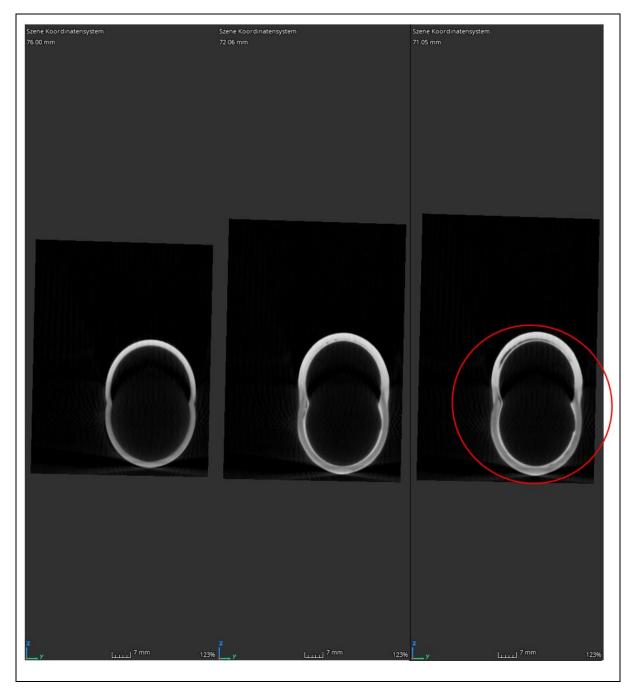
Right weld (No.2) side view picture 1-3
